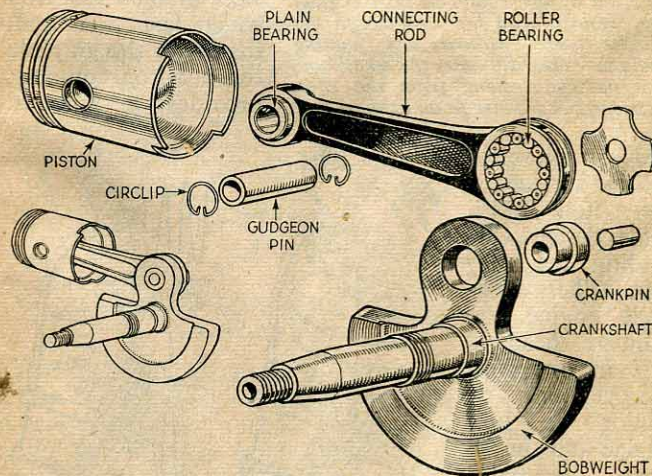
Crankshaft, piston and connecting-rod of the Villiers Junior-de-luxe engine. In the small drawing on the left the parts are shown fitted together
